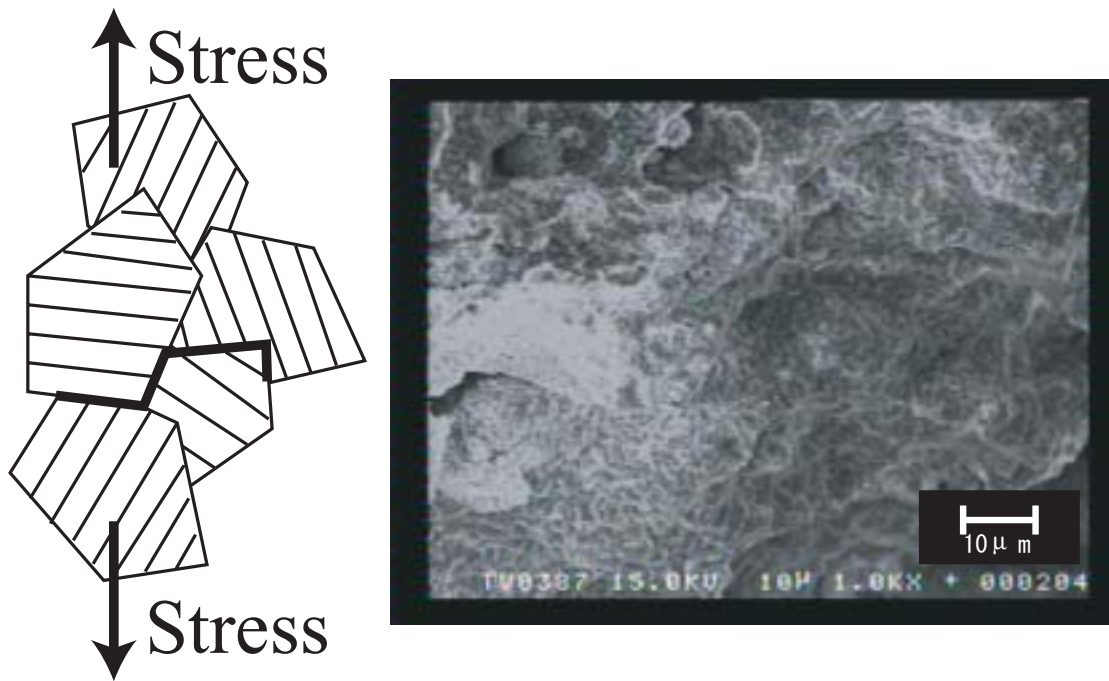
Illustration of the fracture model of TiAl intergranular fracture.(left) The photograph of the fracture surface of TiAl intergranular fracture. ($\times 1000$) (right)
